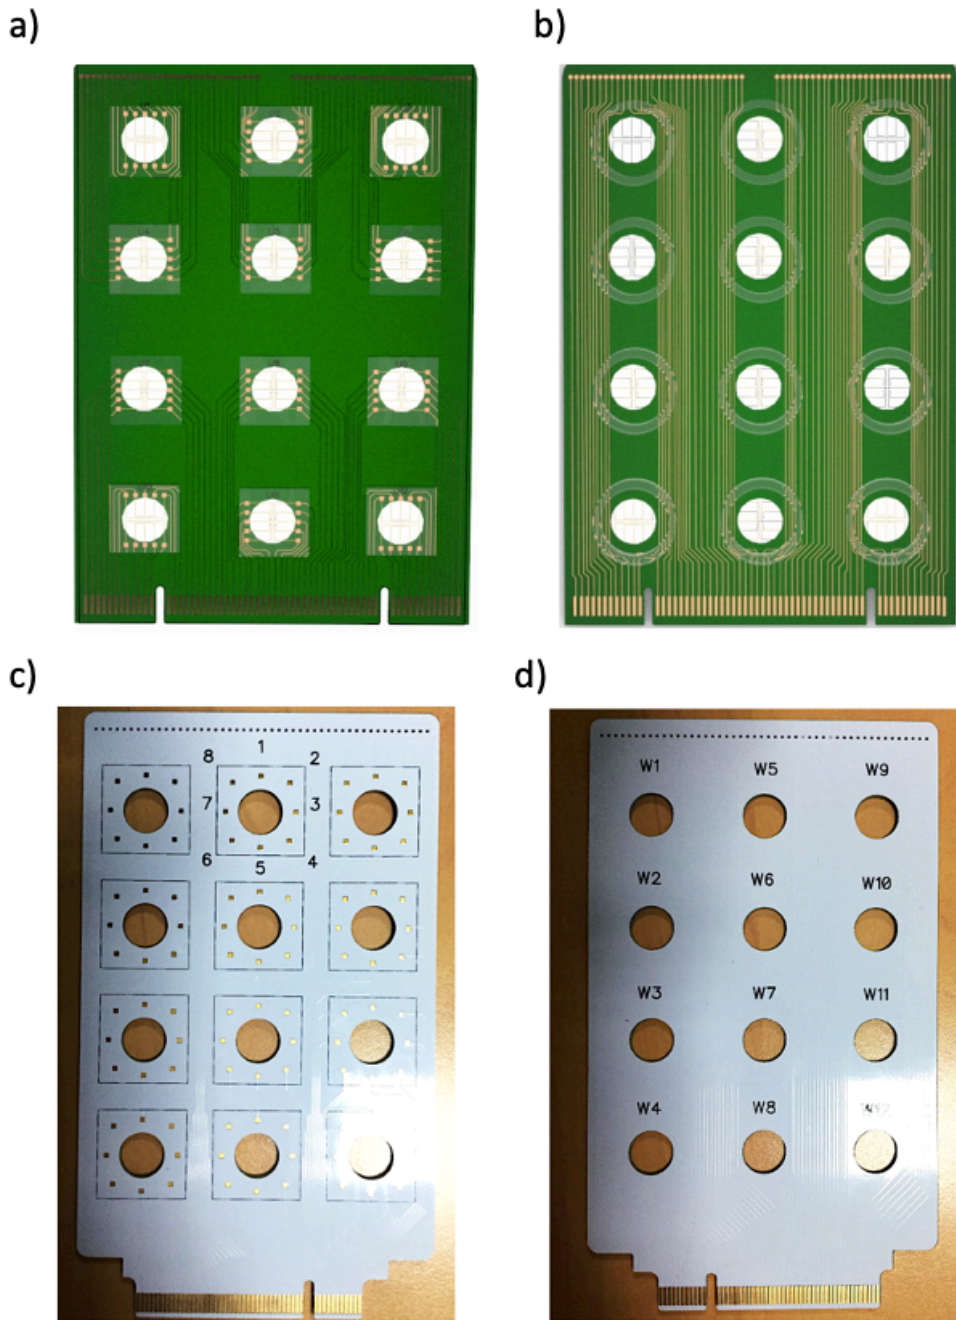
From Solidworks rendering to final design PCBs n°1. a) and b) display the First PCB layout and design using solid works software. The spacing between wells exactly fit the 12 well plate standards seen in Figure 16. MEAs chip are electrically bonded to the PCB upon the bottom face a). Each one have 8 connections pads maximum. On the top face b), single glass wells could have been added individually, stucked to the PCB with a PDMS creating. c) and d) are pictures of the final PCB prototype. Well and pads numbering have been added to visually facilitate the user handling. Chips are now connected via 8 pads dispatched in circle as seen in c). A third layer of conductive tracks have been added inside the PCB. It allows to increase the spacing between the connecting pads and eased the bonding between the MEA chips and the PCB.
